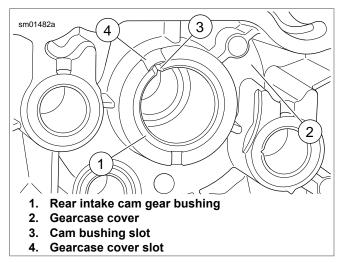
Rear Intake Cam Gear Bushing Installed in Gearcase Cover
